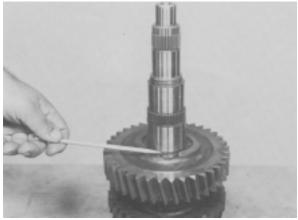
Position 1st gear split washer locating ball in shaft. Install split washer in washer groove with ends of washer together at locating ball.
